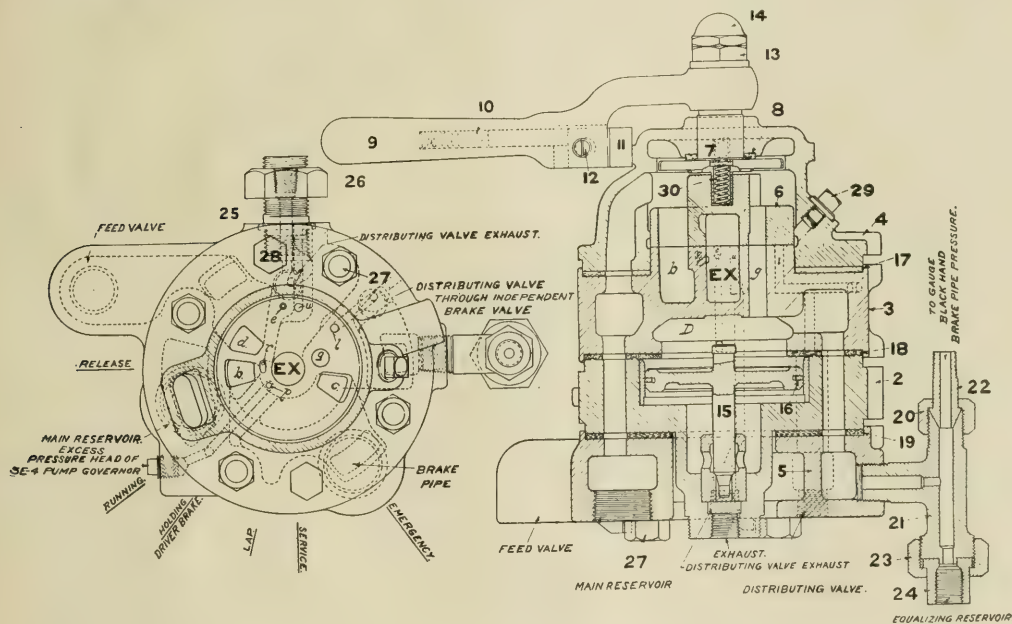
H. BRAKE VALVE, AUTOMATIC BRAKE.
